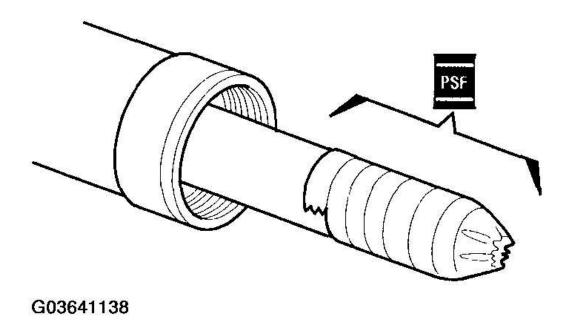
Coating Surface Of Tape With Power Steering Fluid Courtesy of AMERICAN HONDA MOTOR CO., INC.
